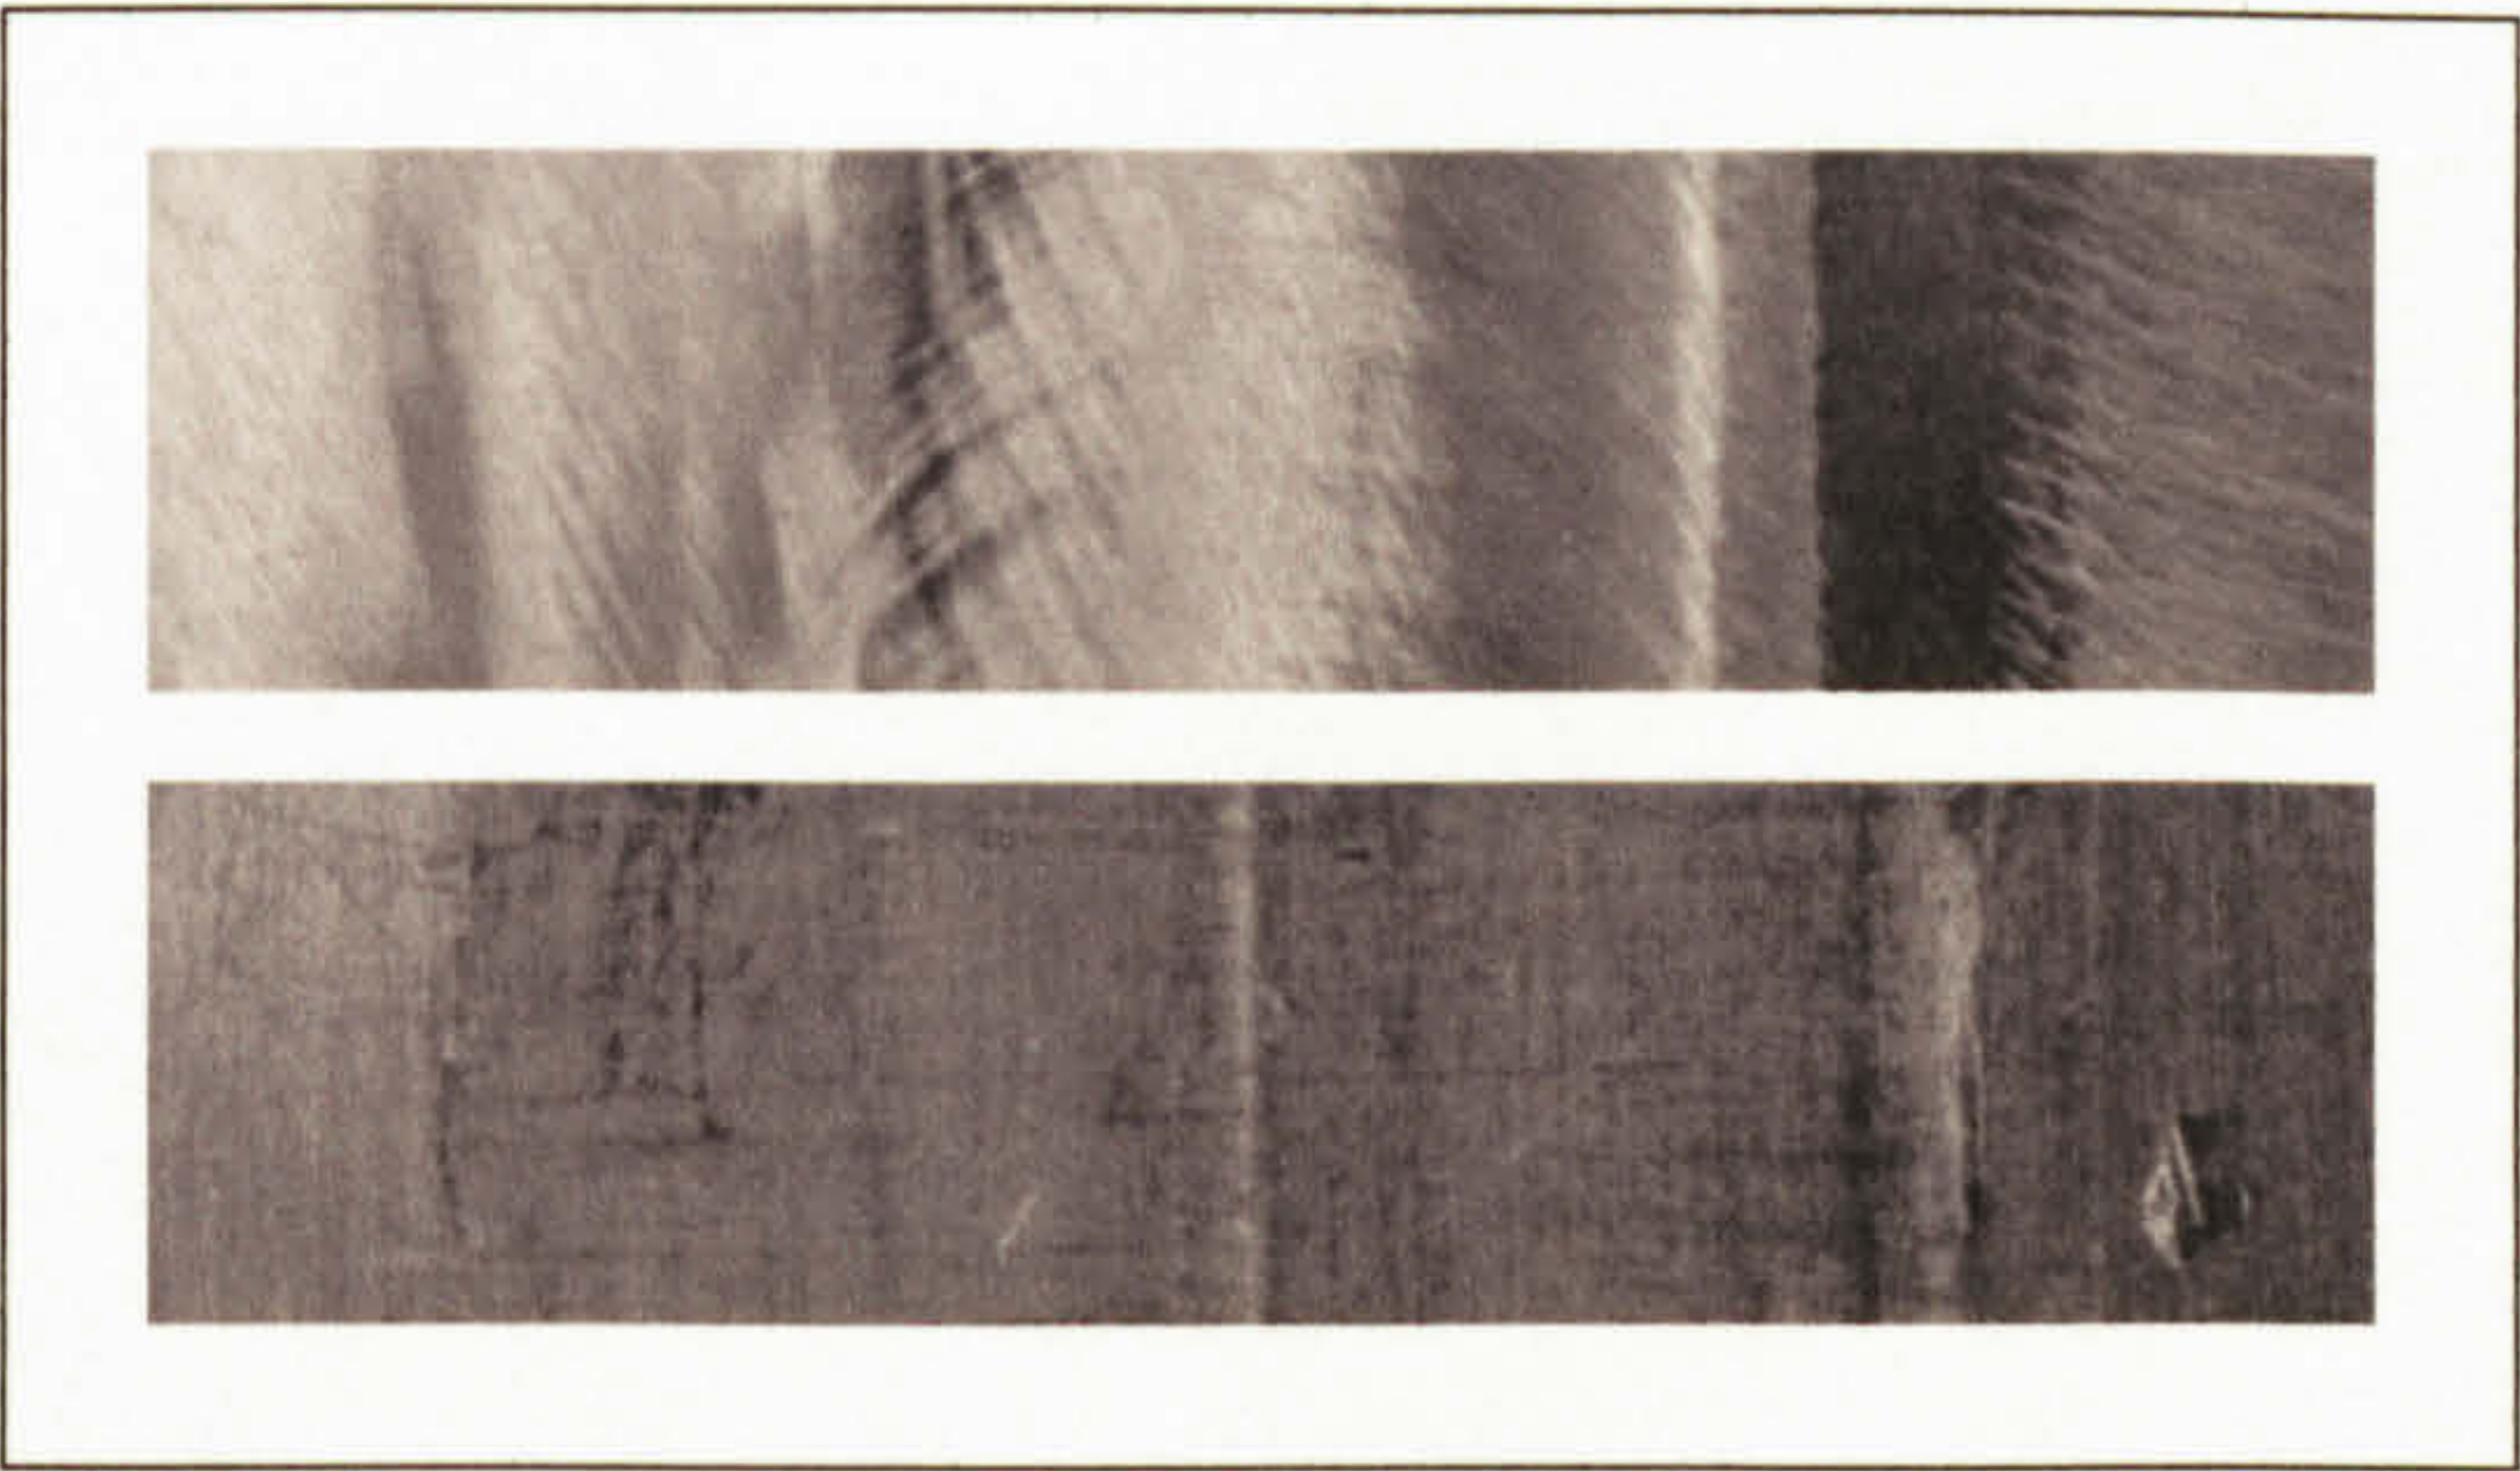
FS SP friction band (or tool shoulder) side of weld (top), backing plate side (bottom).
